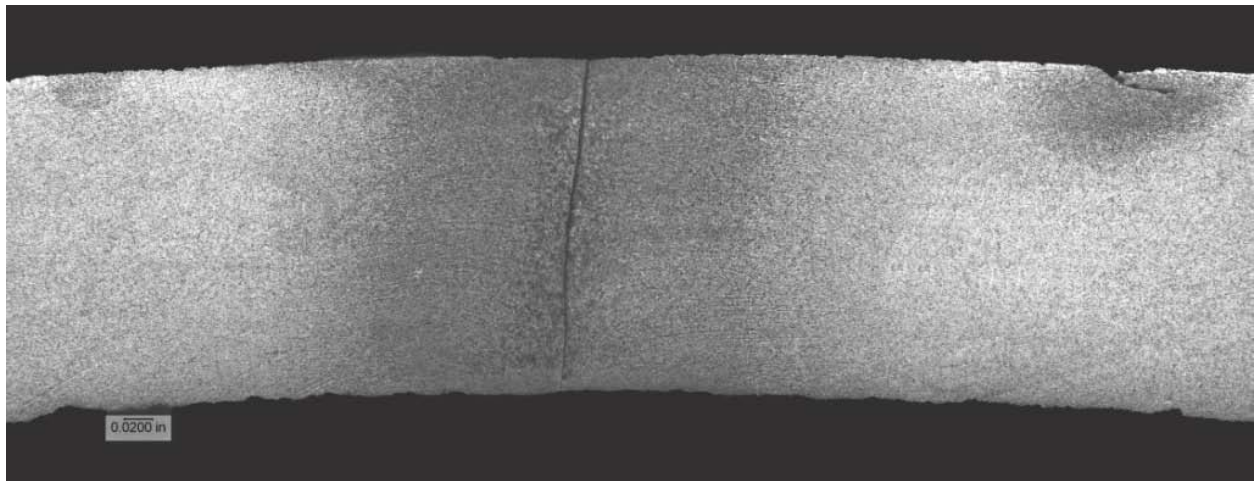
Another Section across a Cold Weld in LF-ERW Pipe
